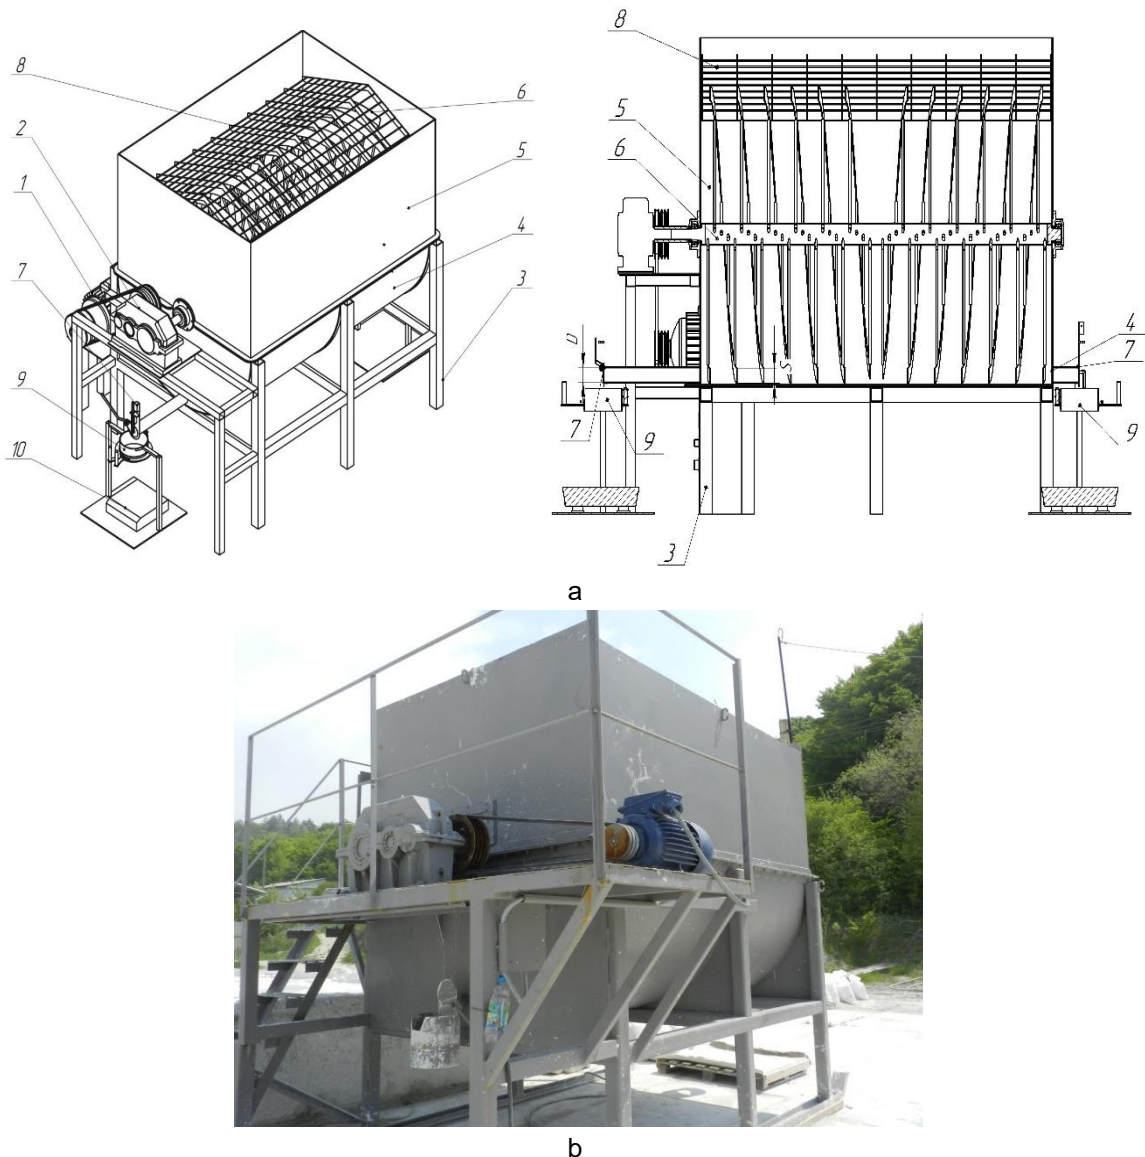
Structural scheme (a) and general view (b) of the machine for packing slaked lime in polyethylene containers
